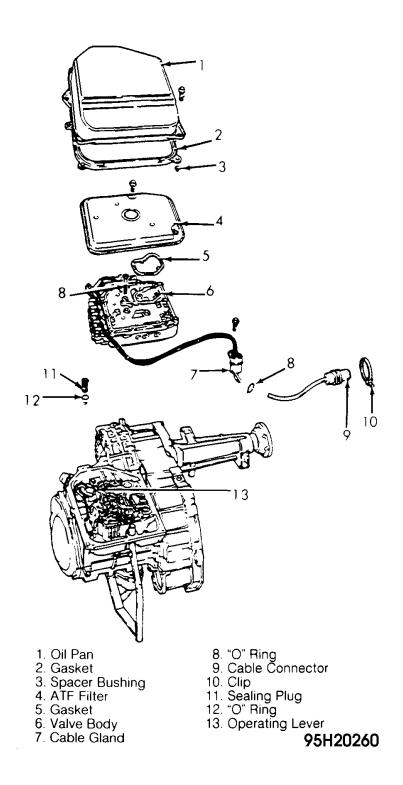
Exploded View Valve Body & Components Courtesy of VOLKSWAGEN UNITED STATES, INC.
